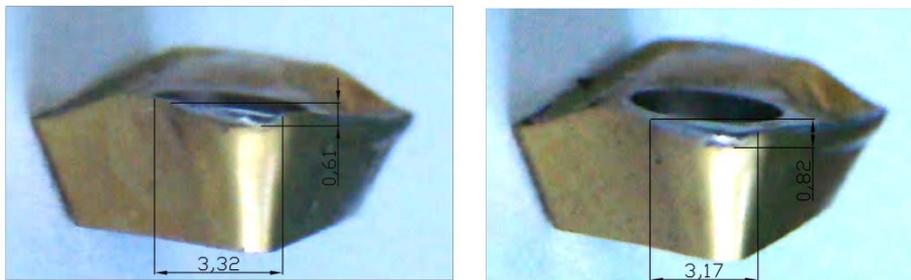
Damage of the machining plates (R390-11 T3 16M-PM 1025) after optimization:
